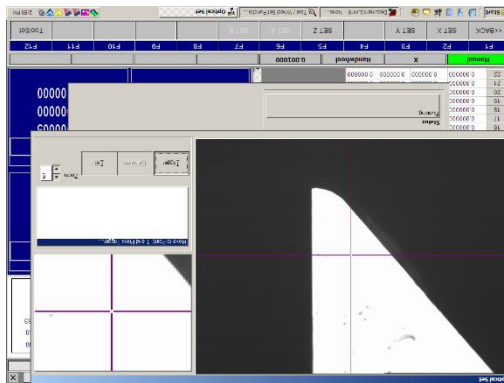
A half radius diamond tool with tool radius of 0.07 mm and a flat surface on the left side.
